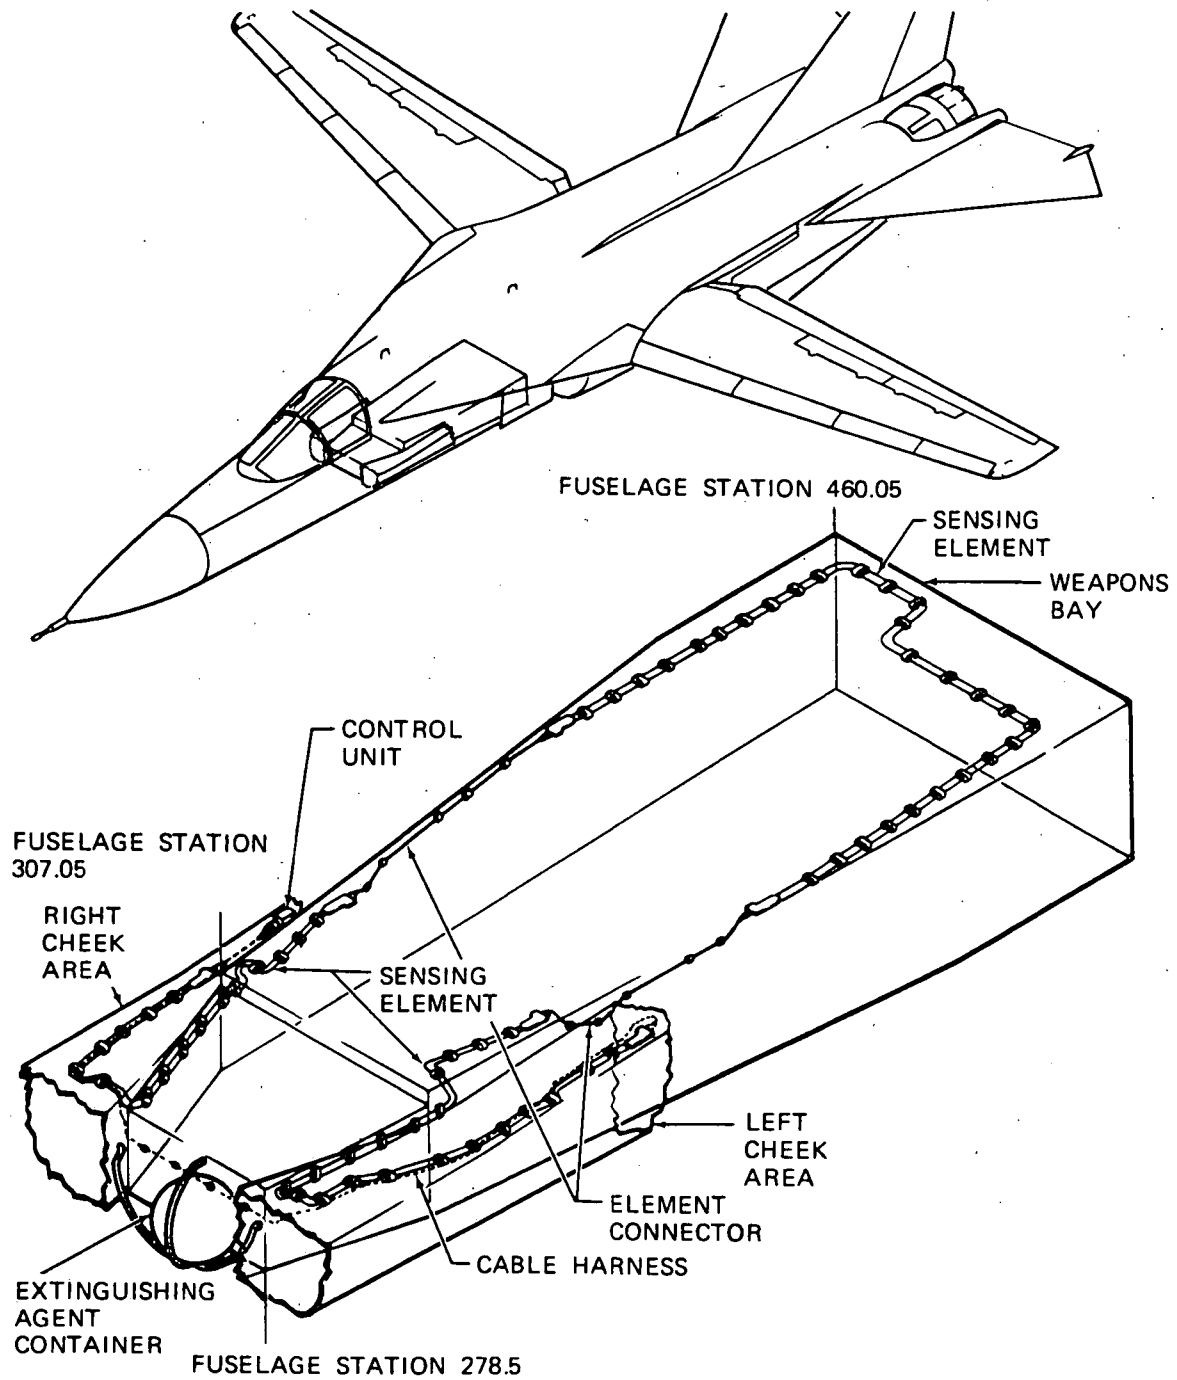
Weapons Bay, Cheek, and Stabilization Glove Fire Detection and Fire Extinguishing System.
